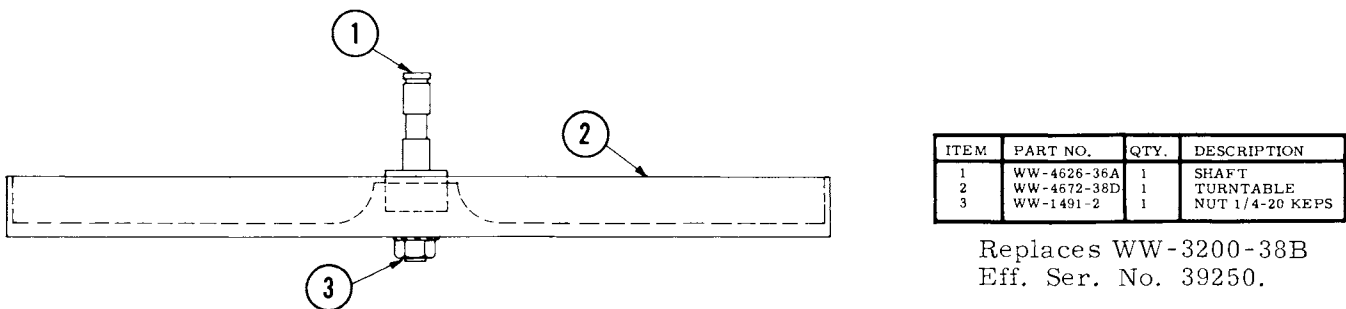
Assembly, Turntable, WW-4621-1B (Part of Assembly, Figure 6).
